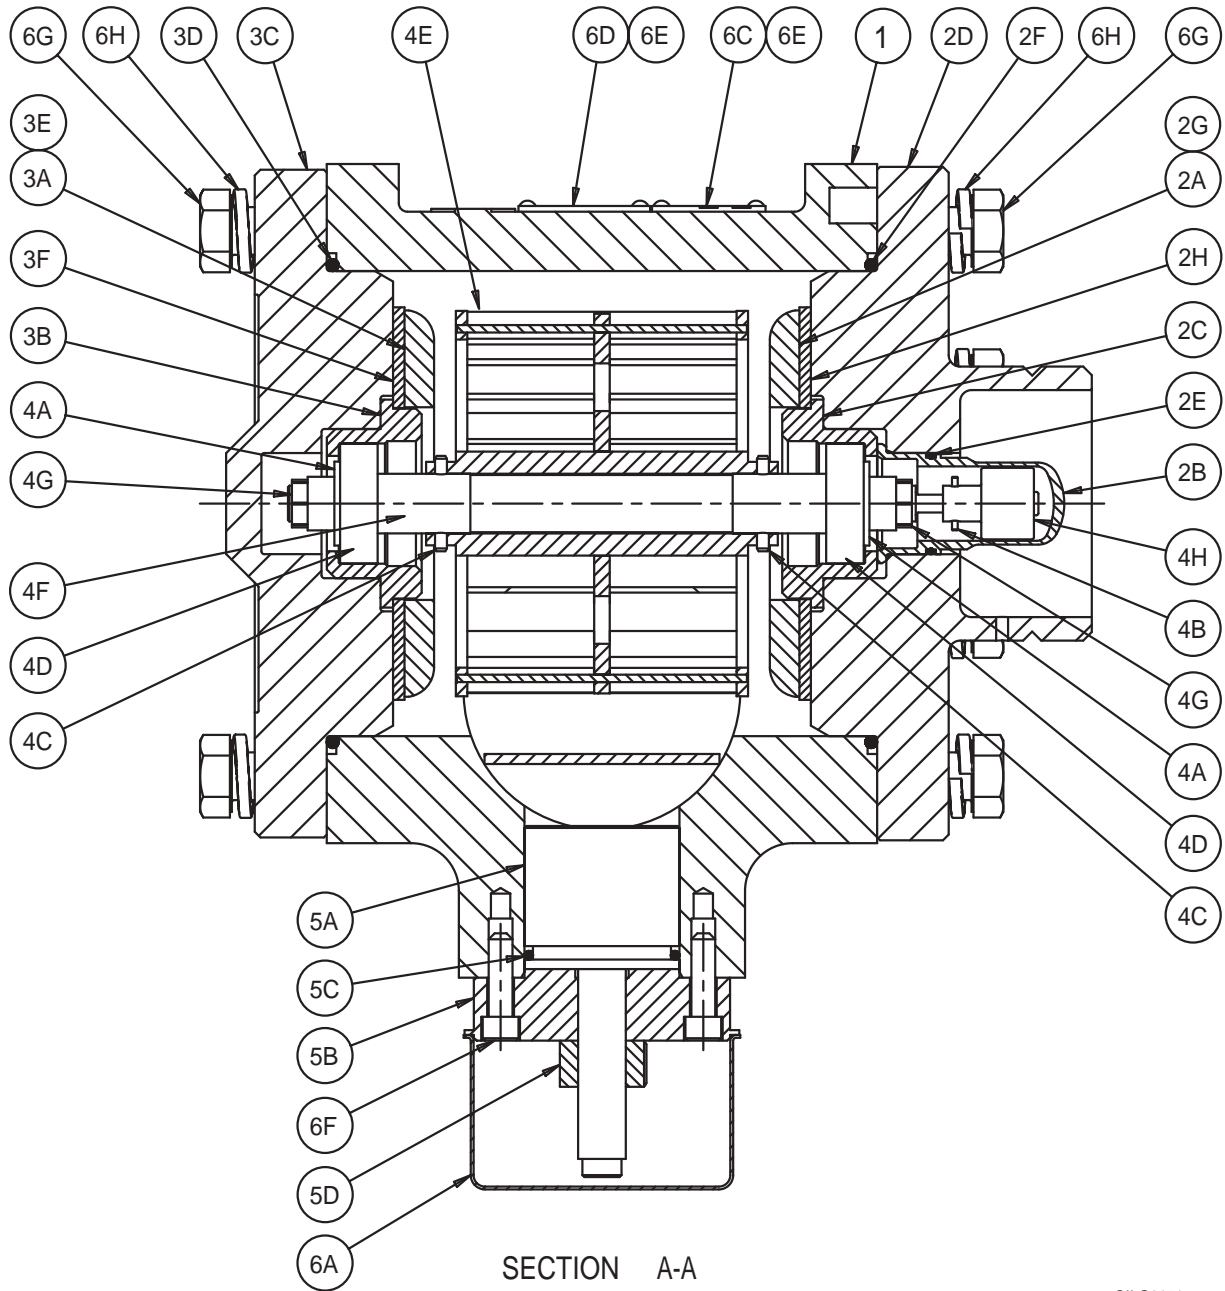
3 inch Portable Meter Assembly (D01346-003)
